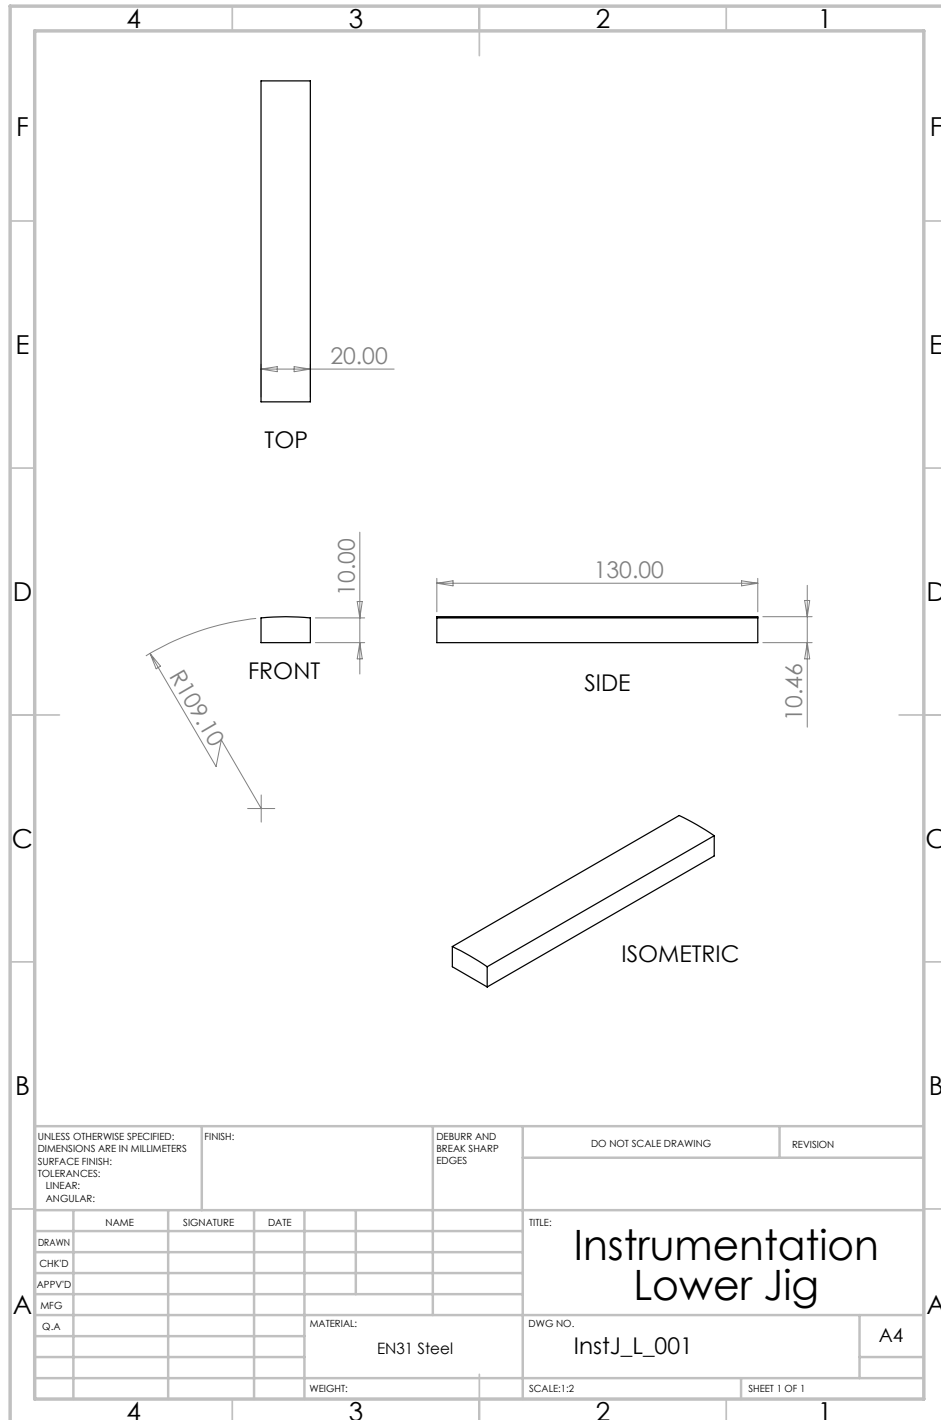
Jig for the inner surface of the MultiLife inner raceway
